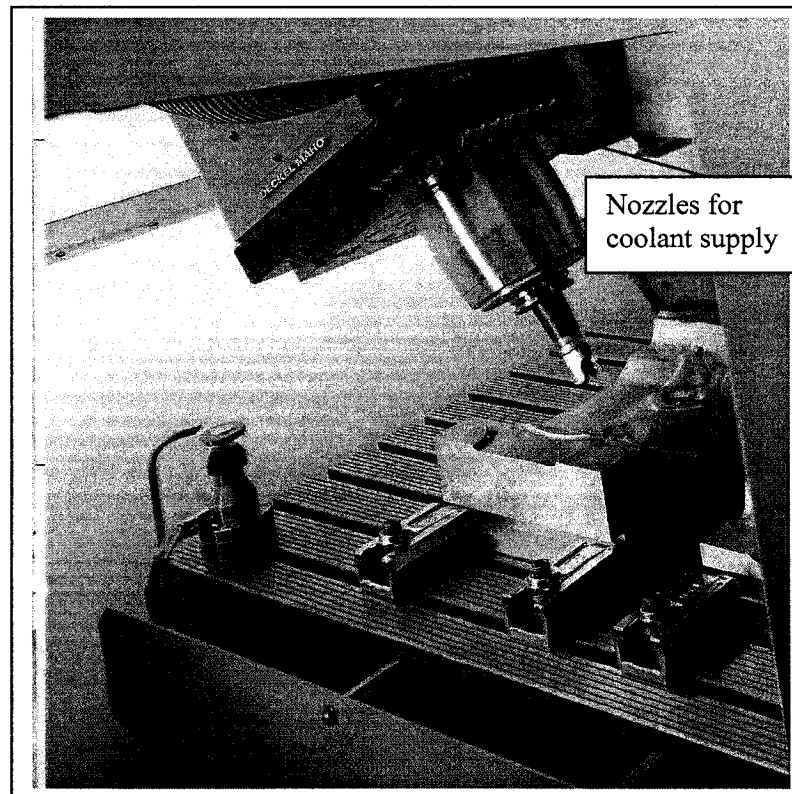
Coolant supplied through nozzles in CNC milling machine
